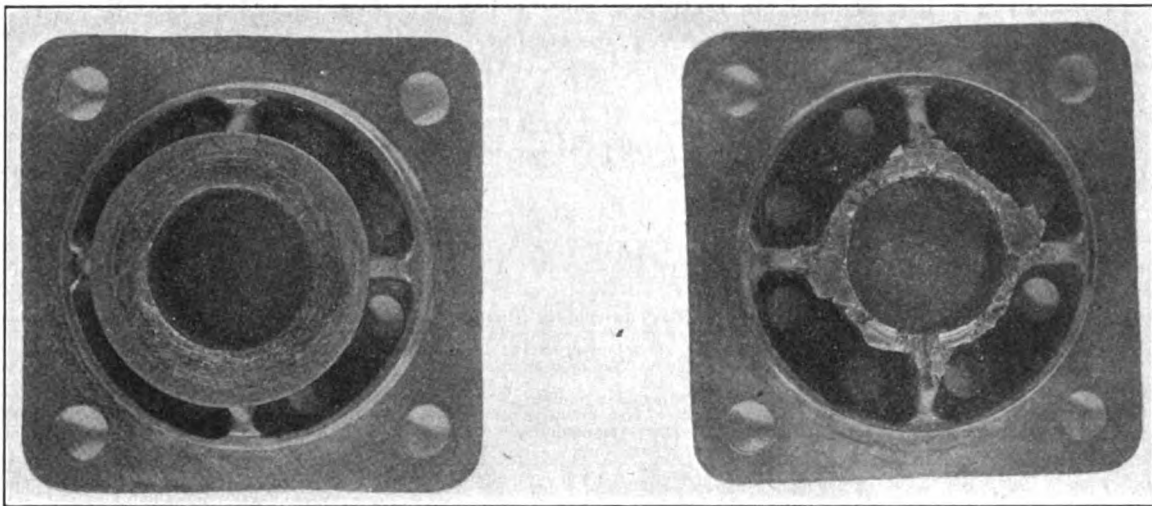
Camshaft drive-shaft lower bearings (upper) after preliminary runs on dynamometer.
